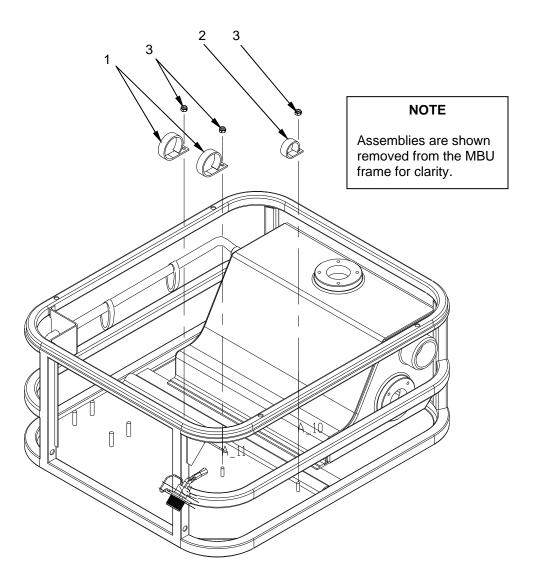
Replace Chassis Mounted Cable Clips and Hose Clamps.
